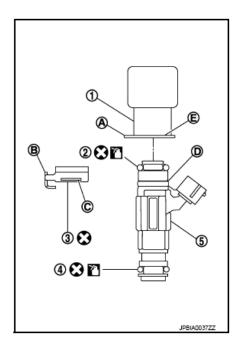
Identifying Fuel Tube, Fuel Damper, Fuel Tube And Clip
